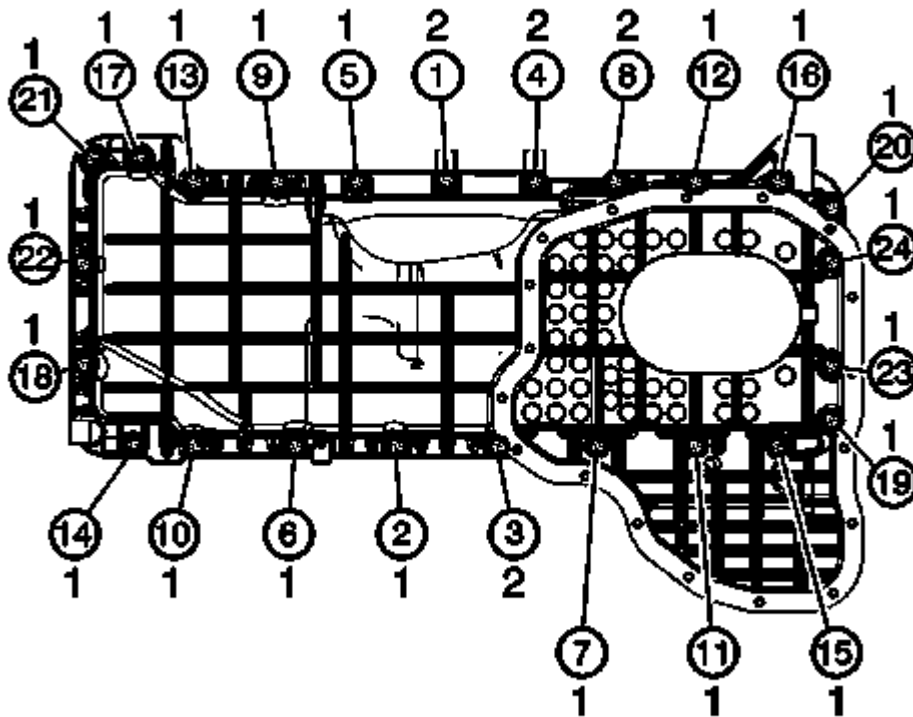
Upper Oil Pan Bolt Tightening Sequence
